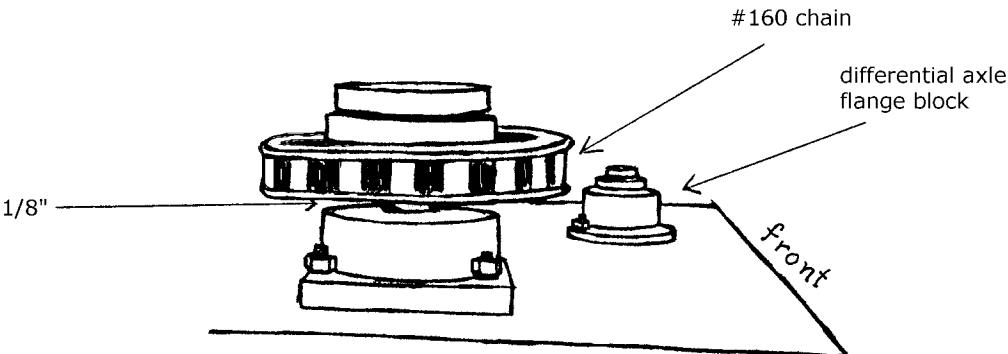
Heavy-duty flange block with roller bearings mounted over jack shaft and bolted into frame.
